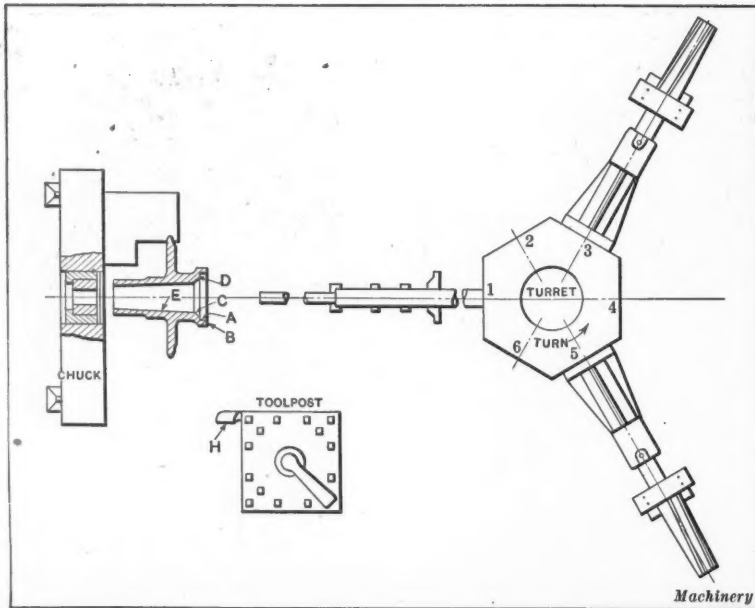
Tooling Equipment for First Operation on Wheel Hub
